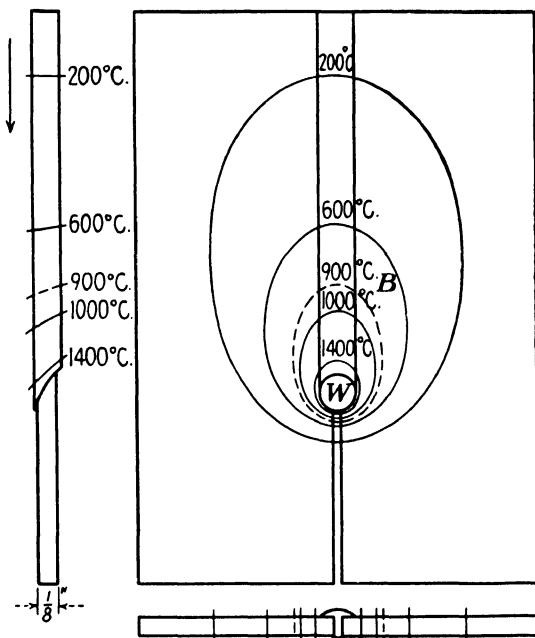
The temperature in a mild-steel plate at an instant during welding. (*Henry and Claussen.*⁽⁴⁷⁾)
